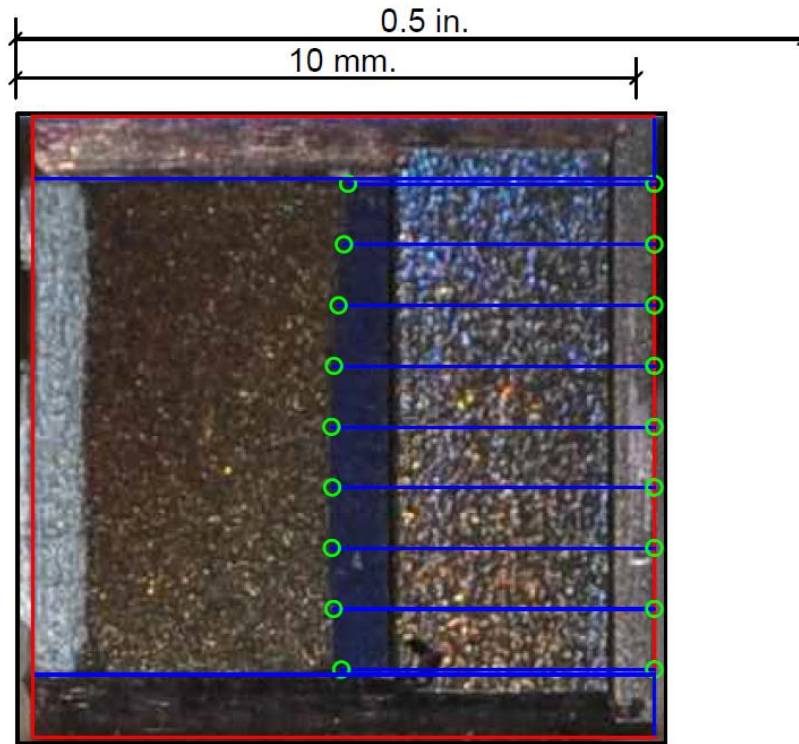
Specimen E36' Fracture Surface
